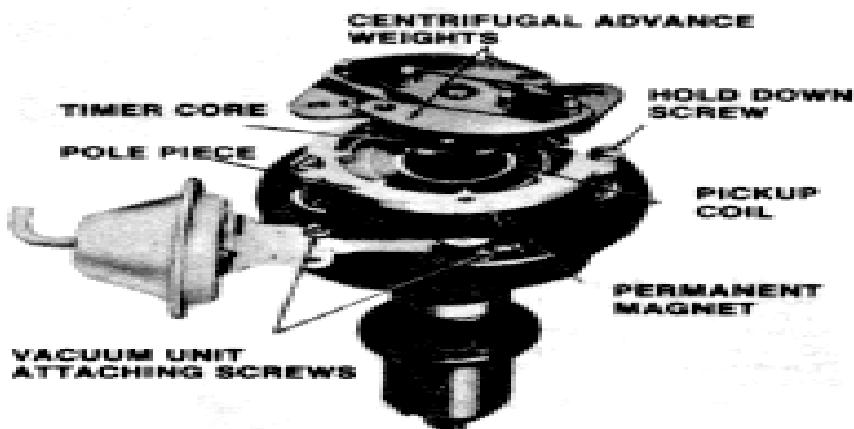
Magnetic Pick-Up Distributor With The Cap And Rotor Removed.(Delco - Remy Division Of General Motor Corporation)
